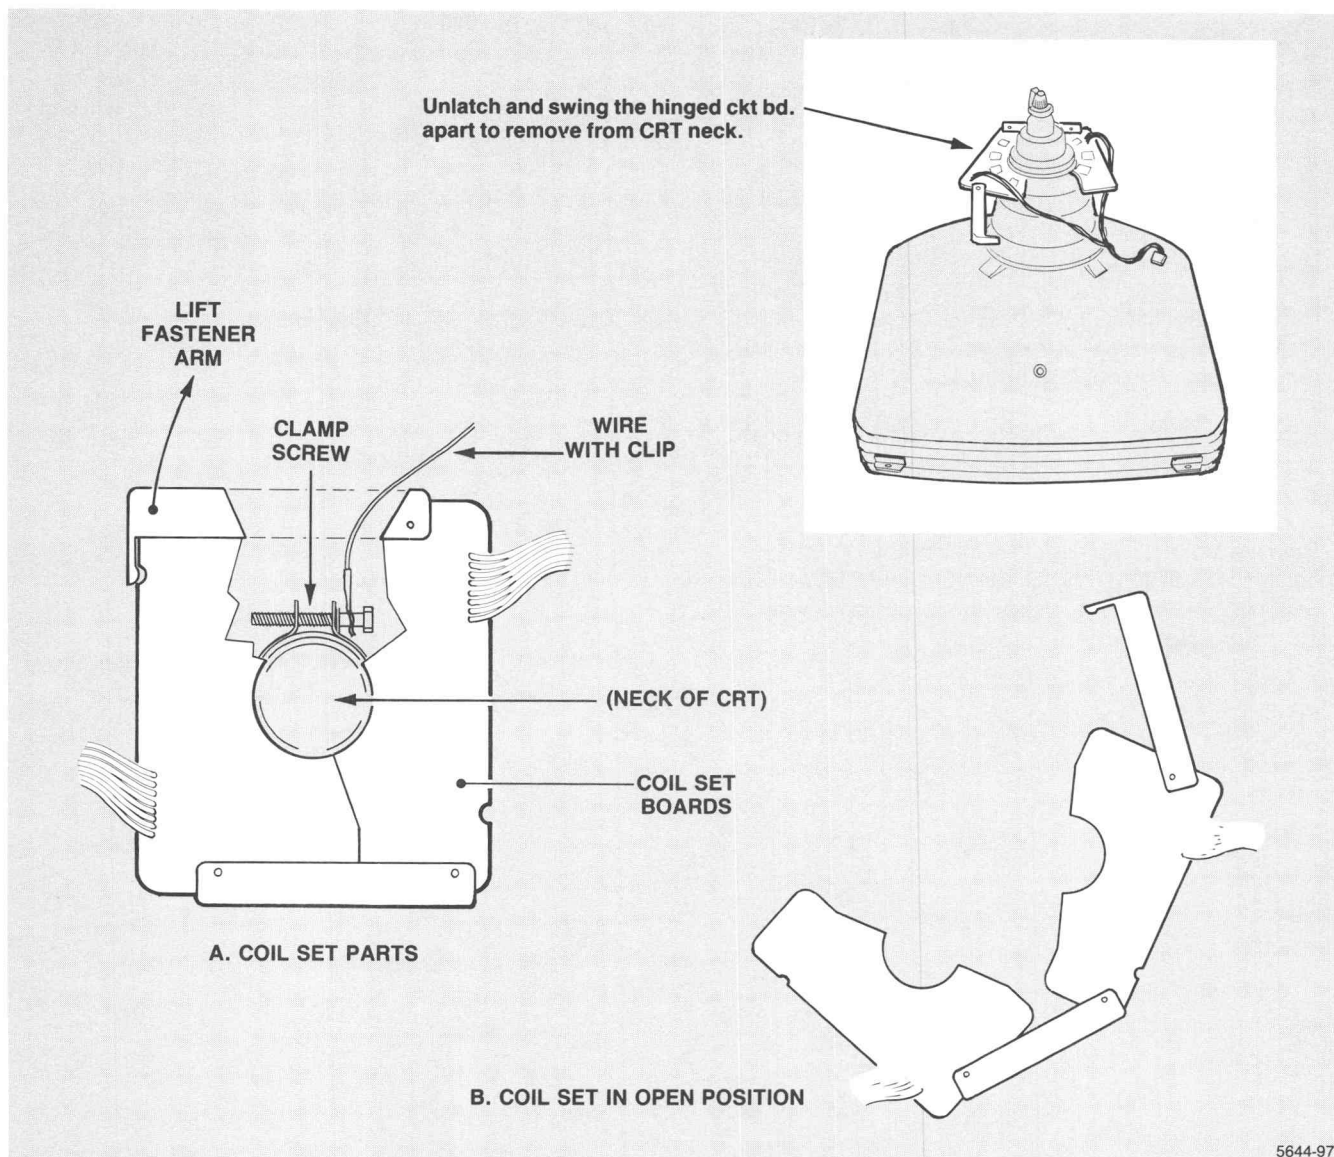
Removing the Convergence Coil Assembly (GMA302).
